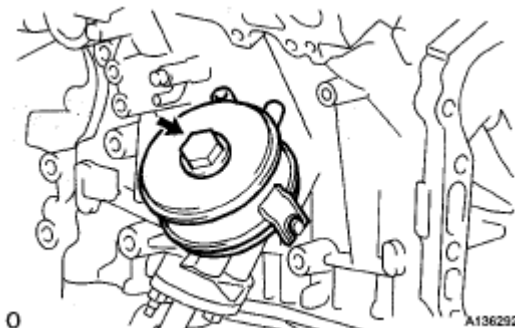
Removing Union Bolt, Oil Cooler Assembly, And O-Ring
